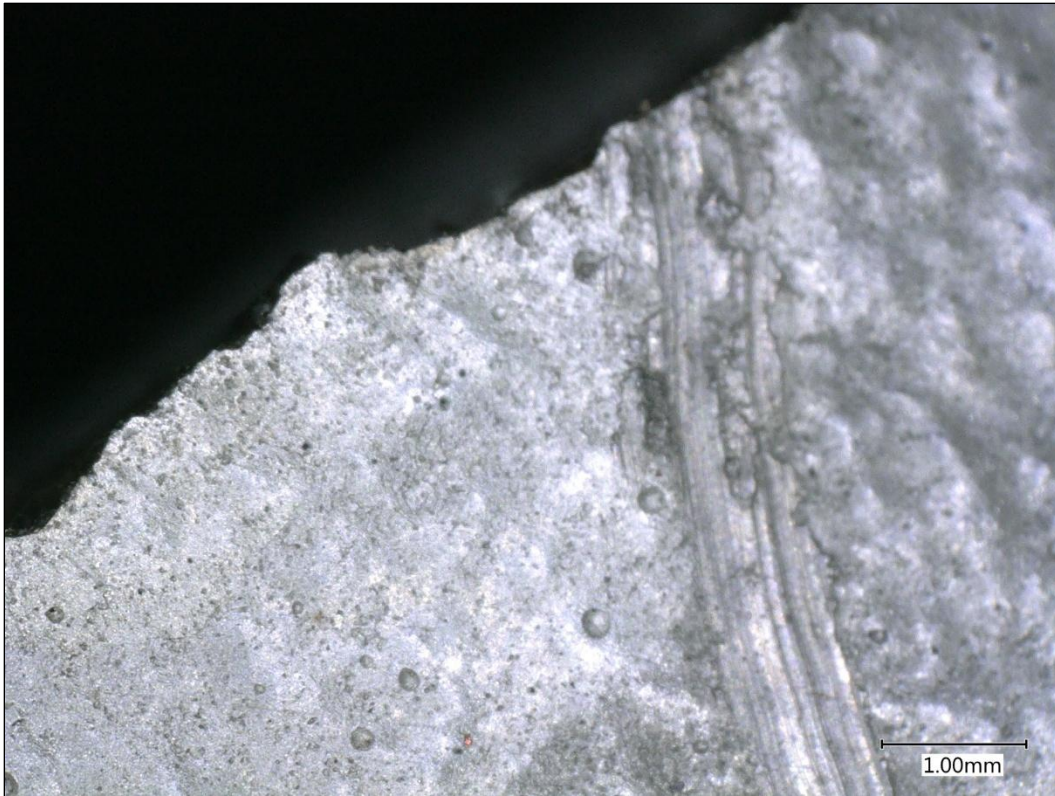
Close-up view of scratch in galvanizing shown at low magnification in Figure 5.
